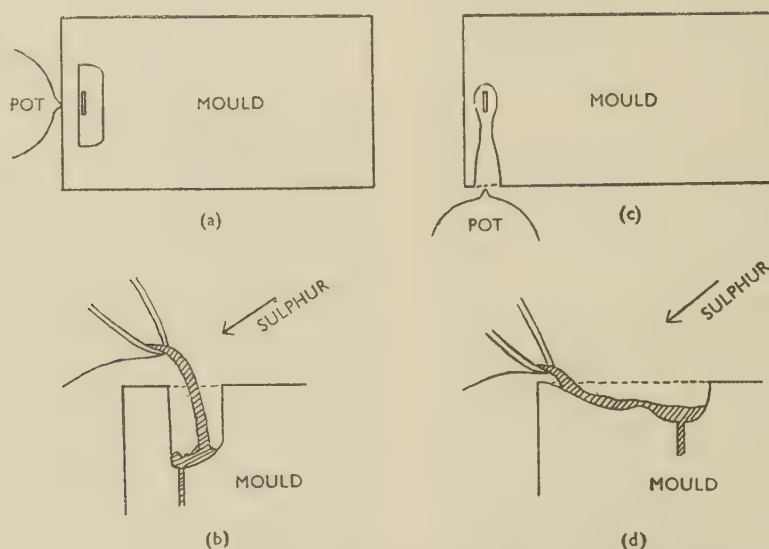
Pouring Method Recommended for Magnesium Alloy Sand Castings.
